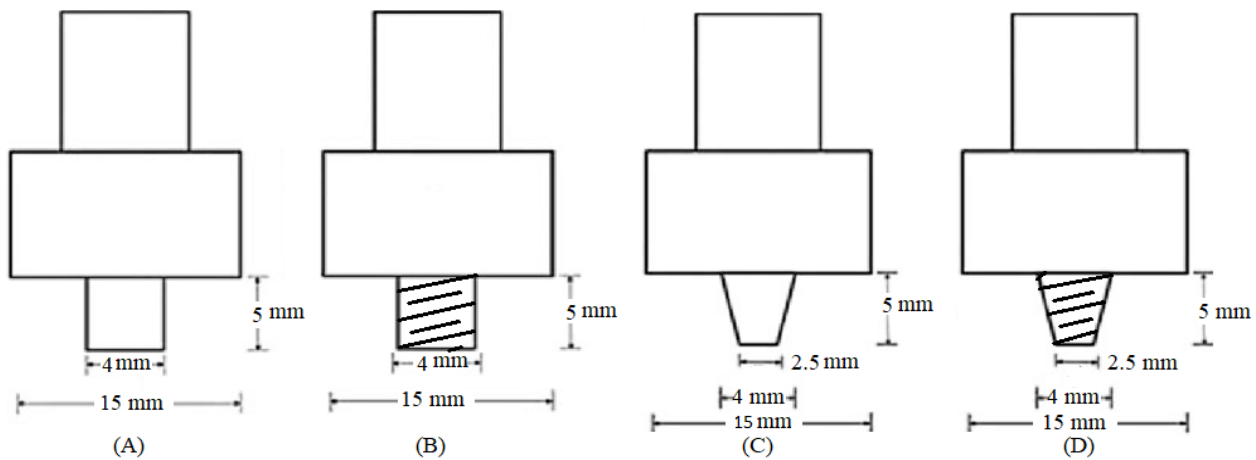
Tools used with threaded and non-threaded cylindrical and conical pins
